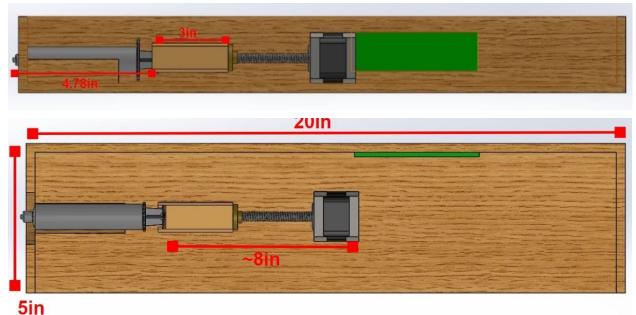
A top view of the Linear Actuator design with dimensions labeled in inches
